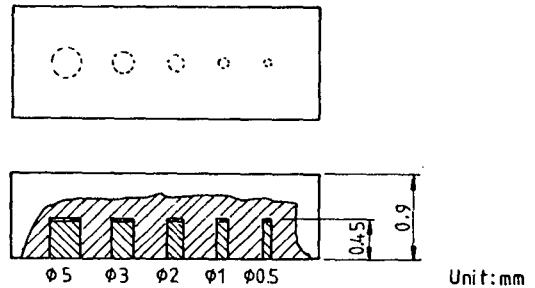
Shape and dimensions of artificial defects in the CFRP specimen.
